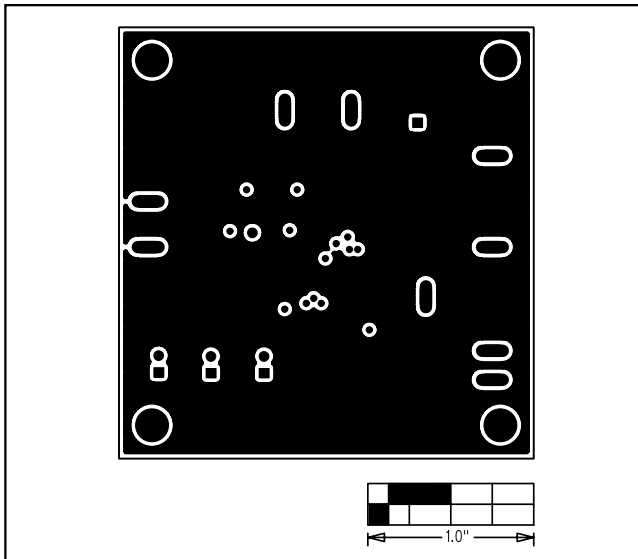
MAX15008 EV Kit PCB Layout—Ground Layer (Layer 2)
